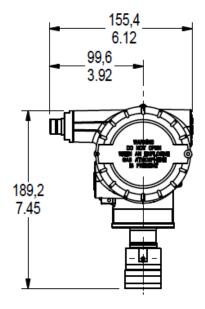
In-Line, typical mounting dimensions for STAW74L (remote adaptor shown)
